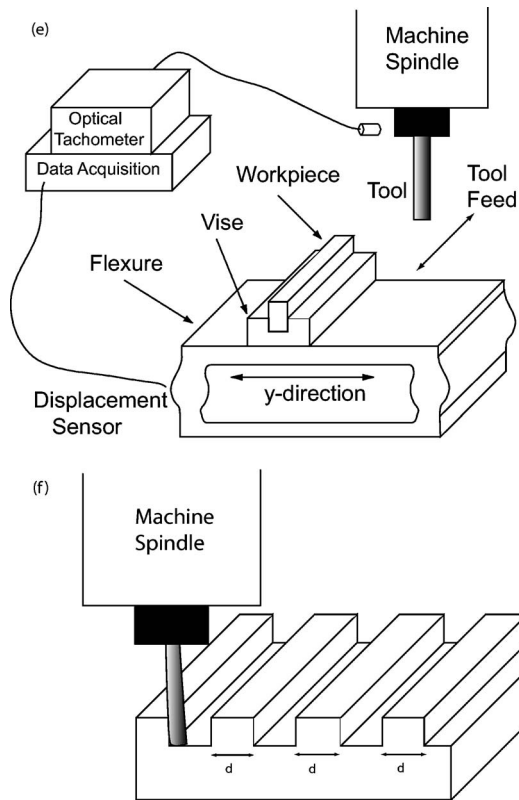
Schematic diagram of surface location error experiments: (e) workpieces were mounted on a single degree of freedom flexure and up-milled in the compliant workpiece and rigid tool tests; and (f) down-milling was used in the compliant tool and rigid workpiece tests.
